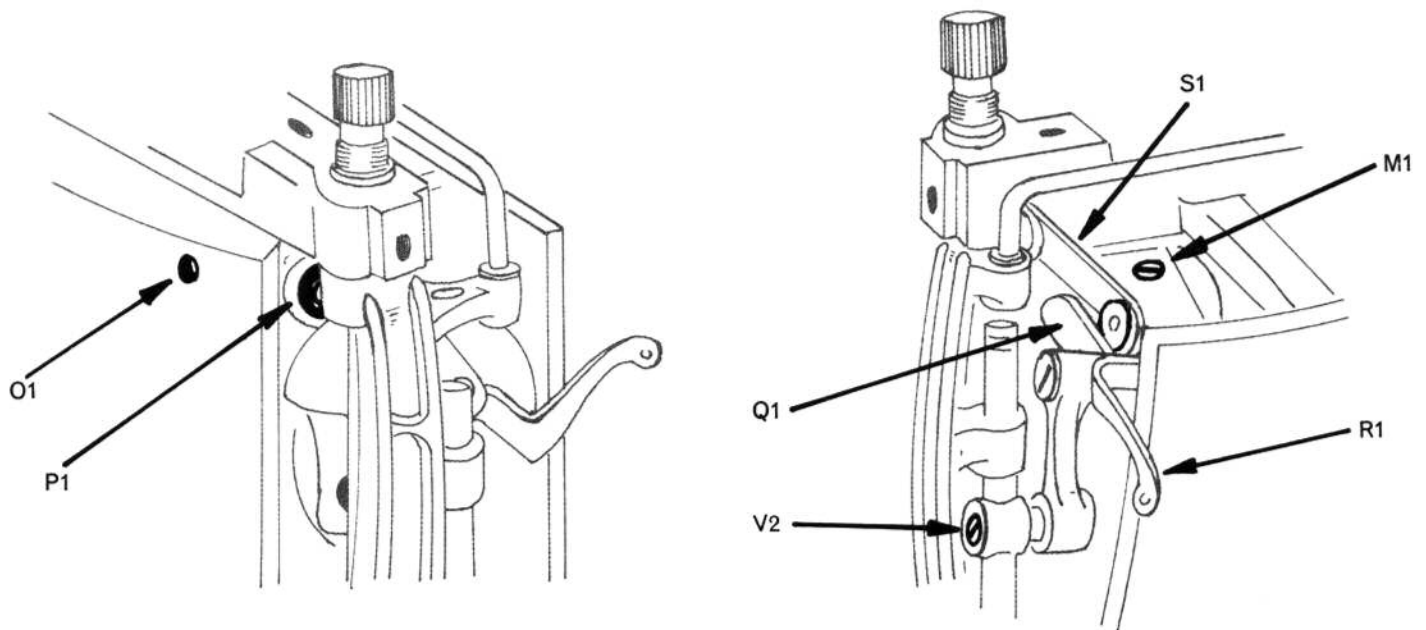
Thread Take-up Mechanism to Eliminate End Play or Binding in Thread Take-up Mechanism.
